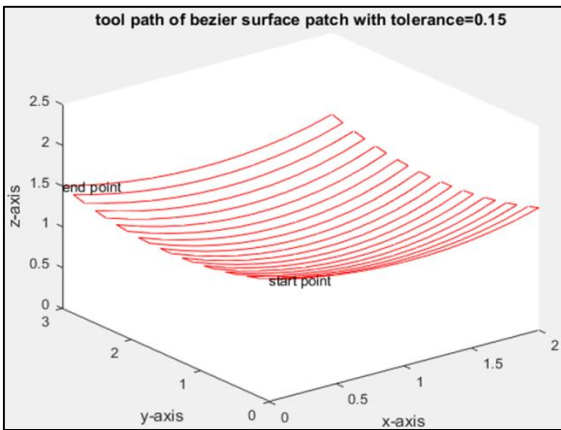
(a): Tool Path of Bezier Patch for Tolerance = 0.15
